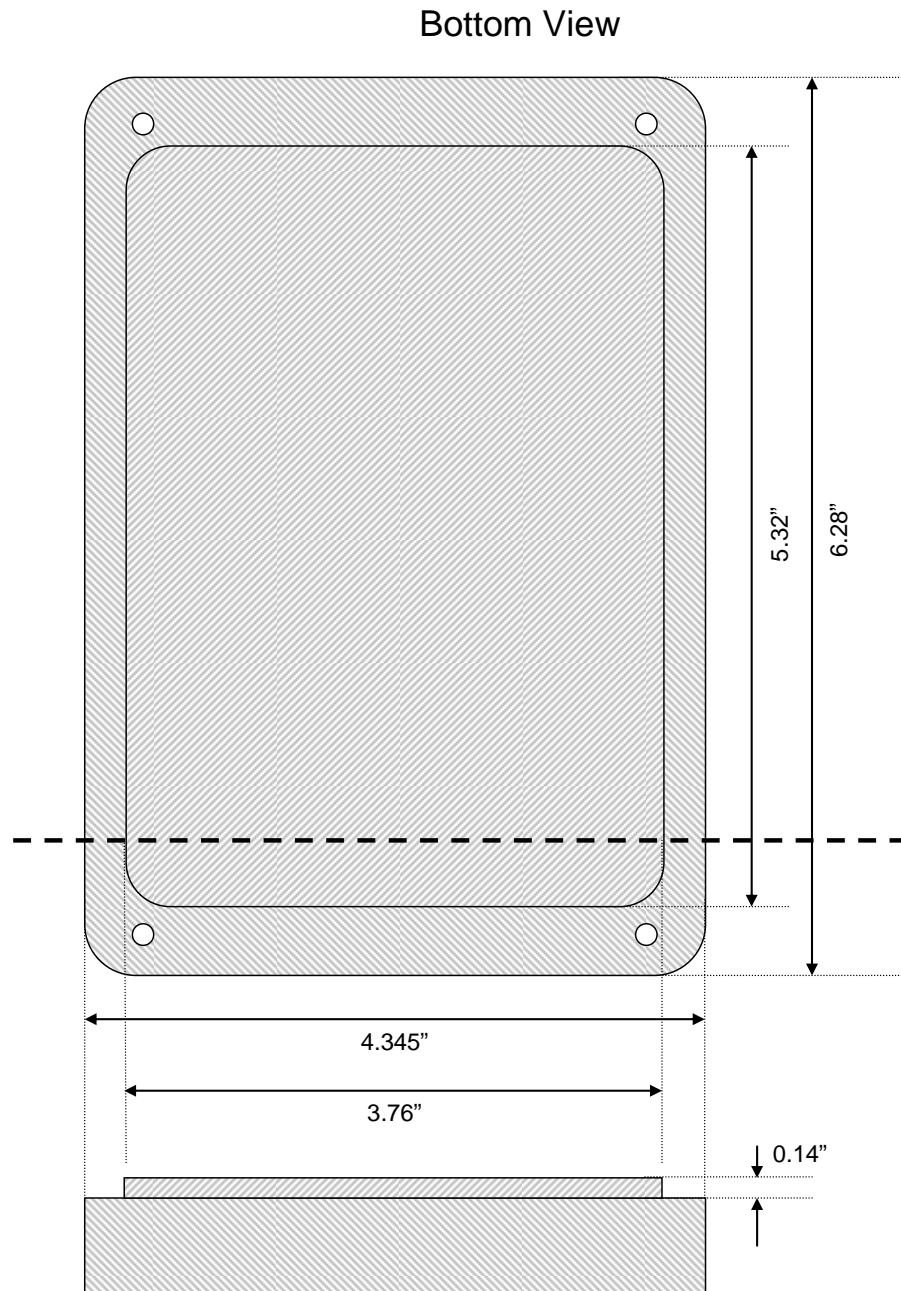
Technical drawing of the insulation plate – bottom view (dimensions in inch)
